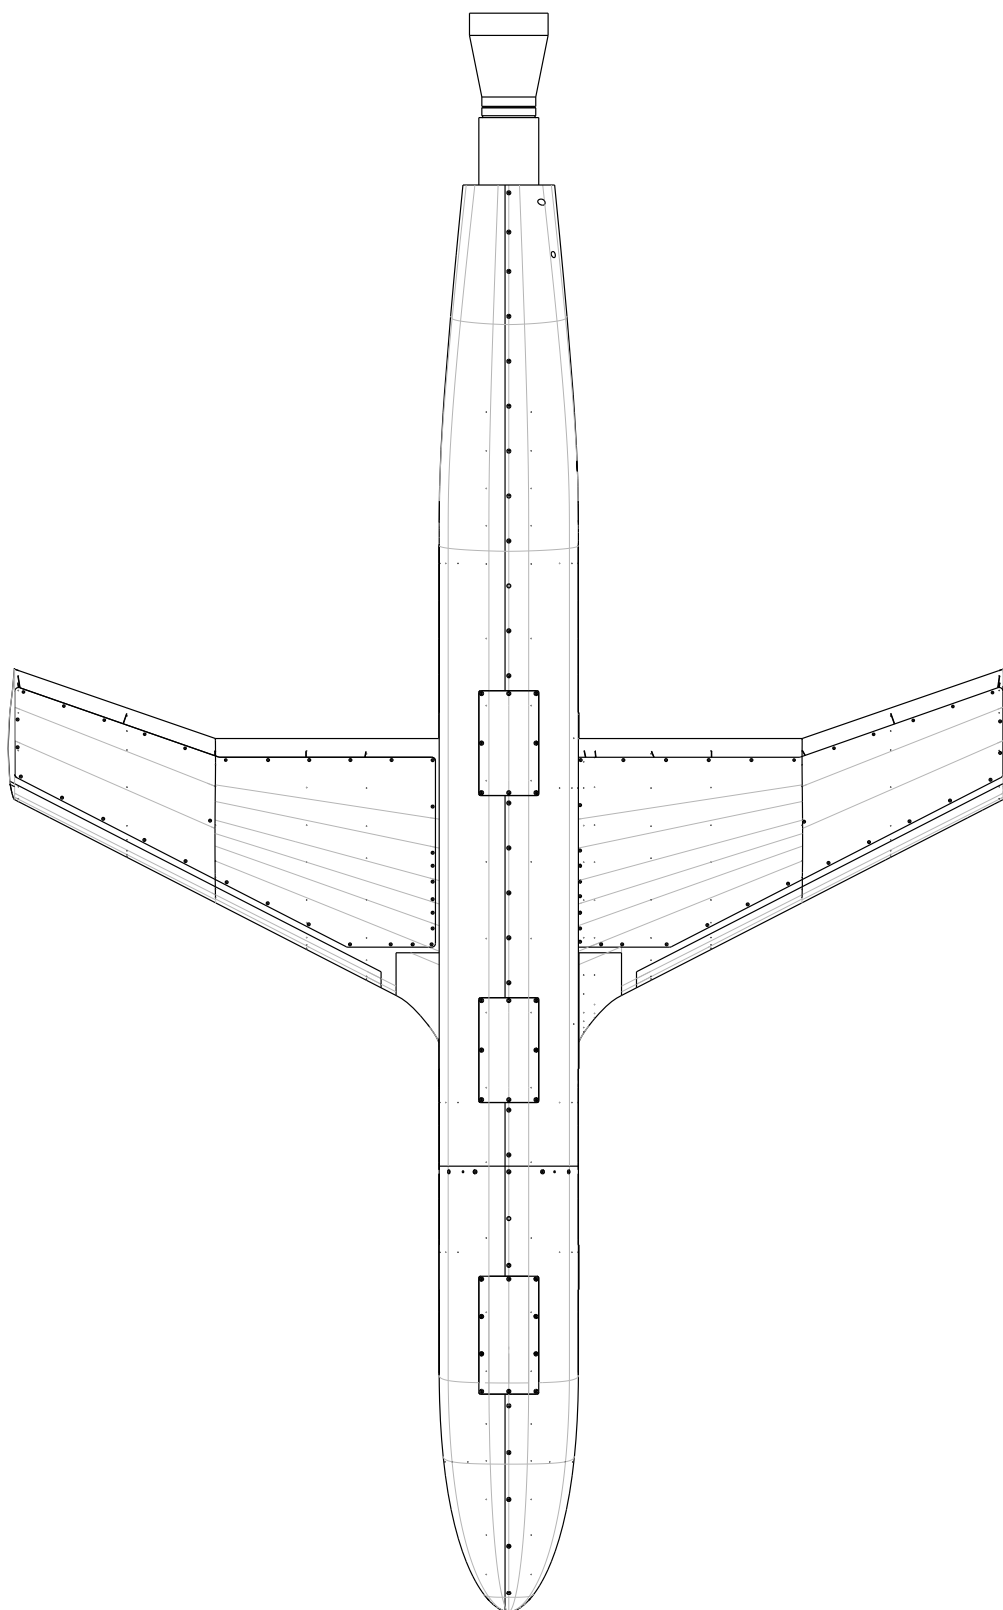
Bottom view of the wing-fuselage junction model assembly.
